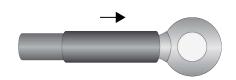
Sliding the Heat-Shrink Tube Over the Ring Terminal Lug
